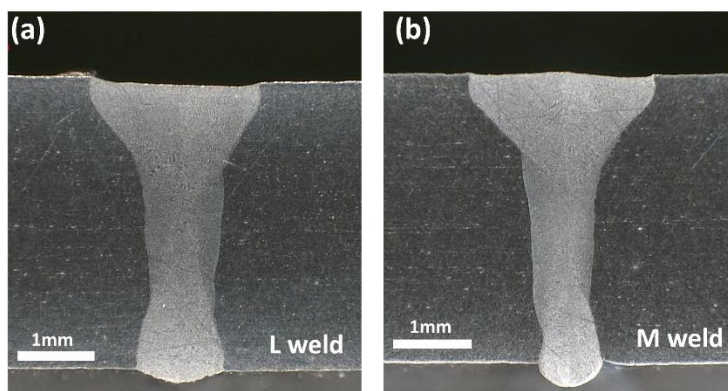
Cross-section macrograph of L weld (a) and M weld (b).
